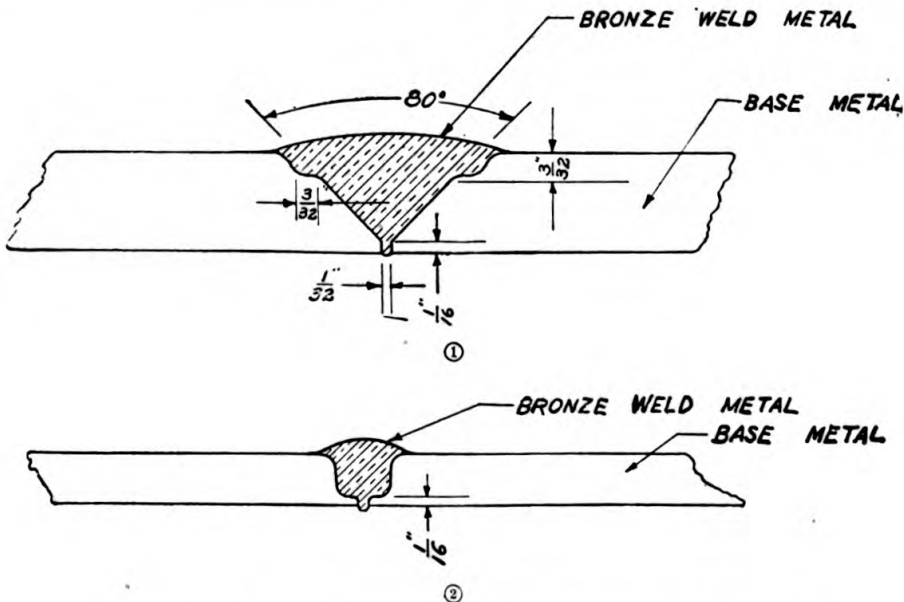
Recommended joints for bronze welding of cast iron.
